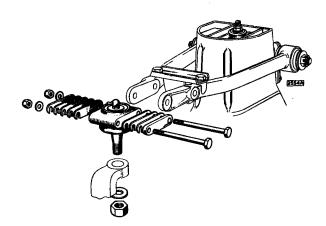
Exploded view of upper ball joint and castor adjustment shims.
